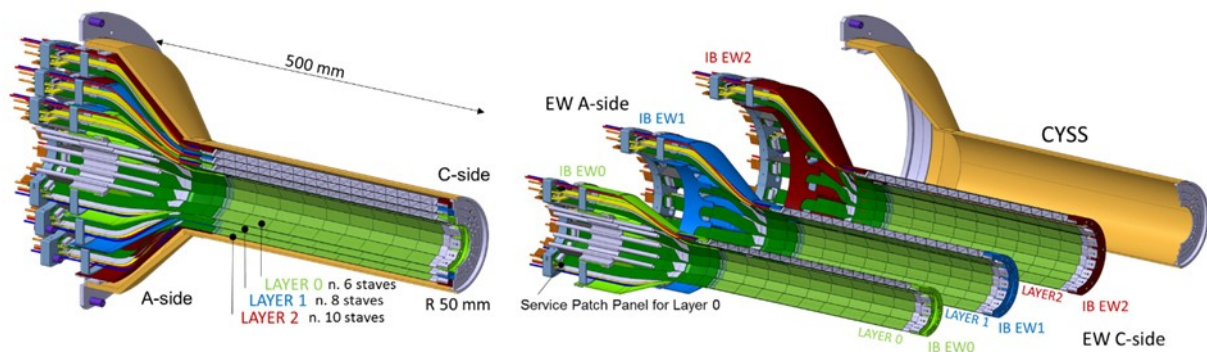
Inner Detector Barrel assembled and exploded [12]
